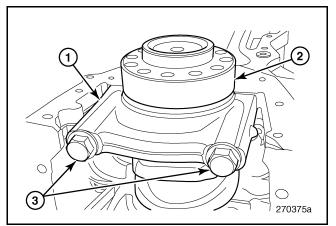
Crankshaft No. 1 Main Bearing Cap
